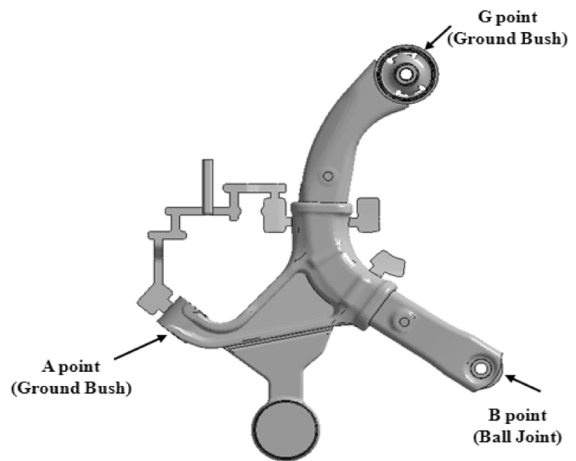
The 3-D CAD drawing of the hybrid-lower arm.
